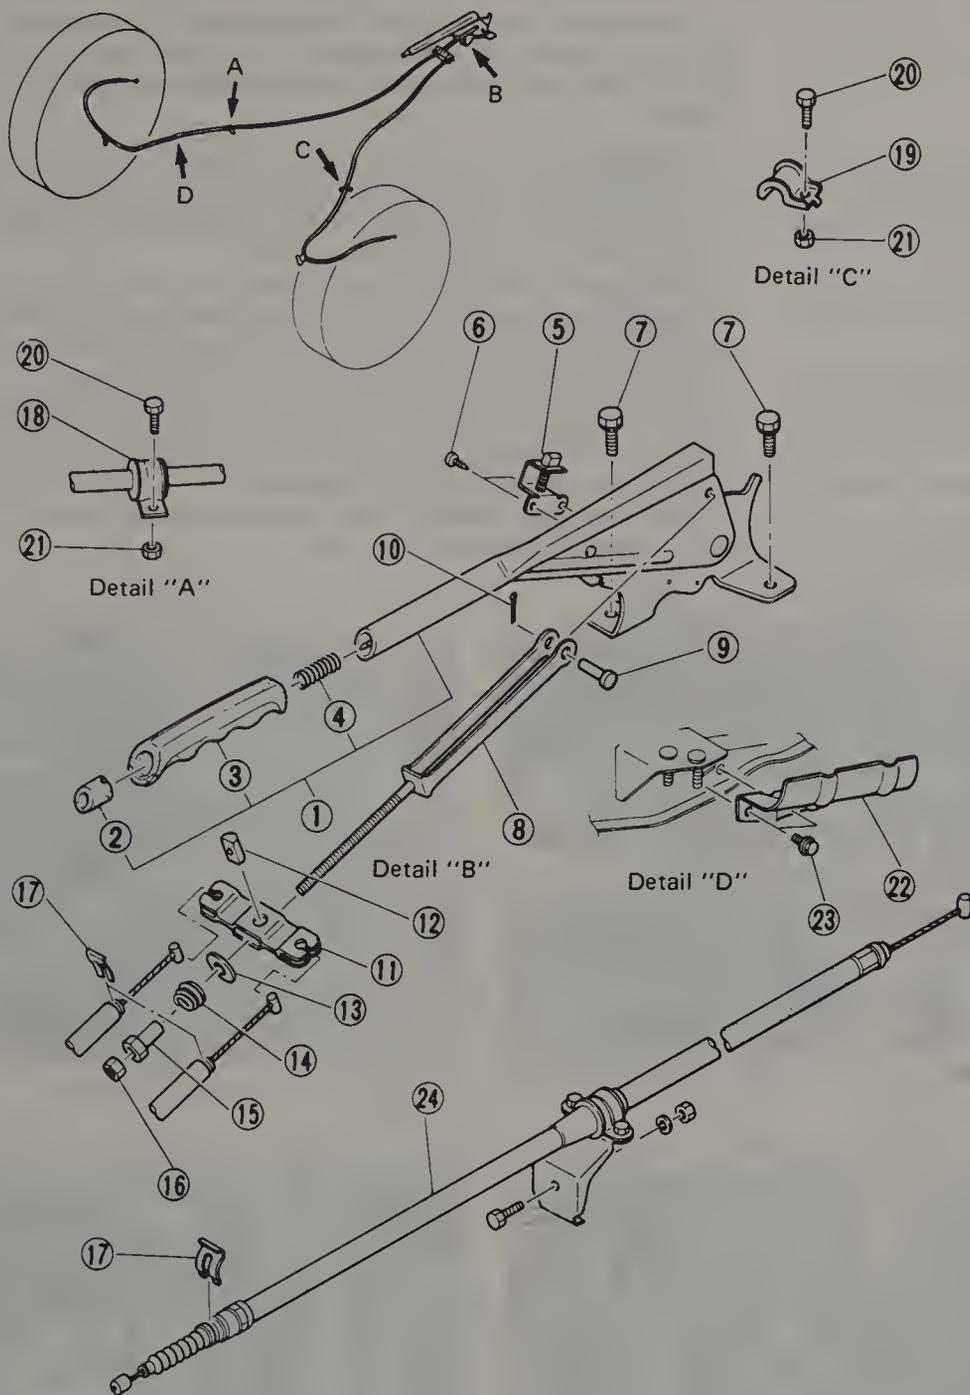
Parking brake components – exploded view (Sec 3)
